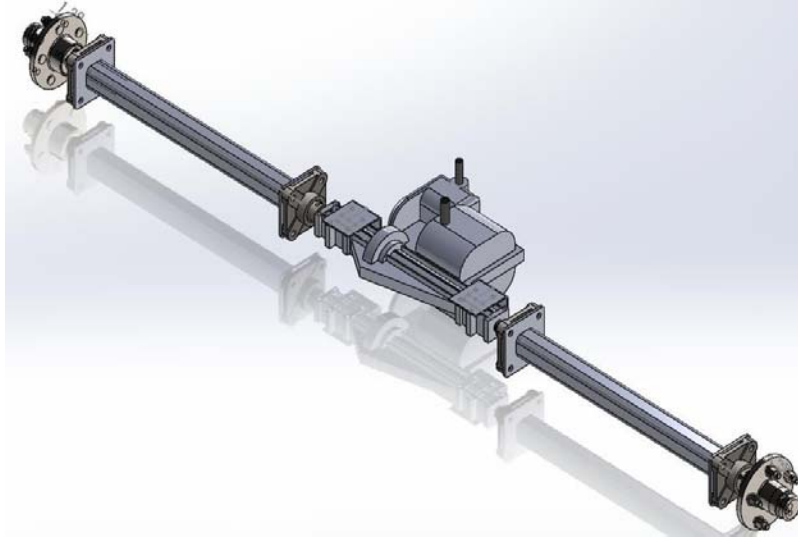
CAD render of the finalized assembly and design of the rear axle subcomponent of the Pedibus.
